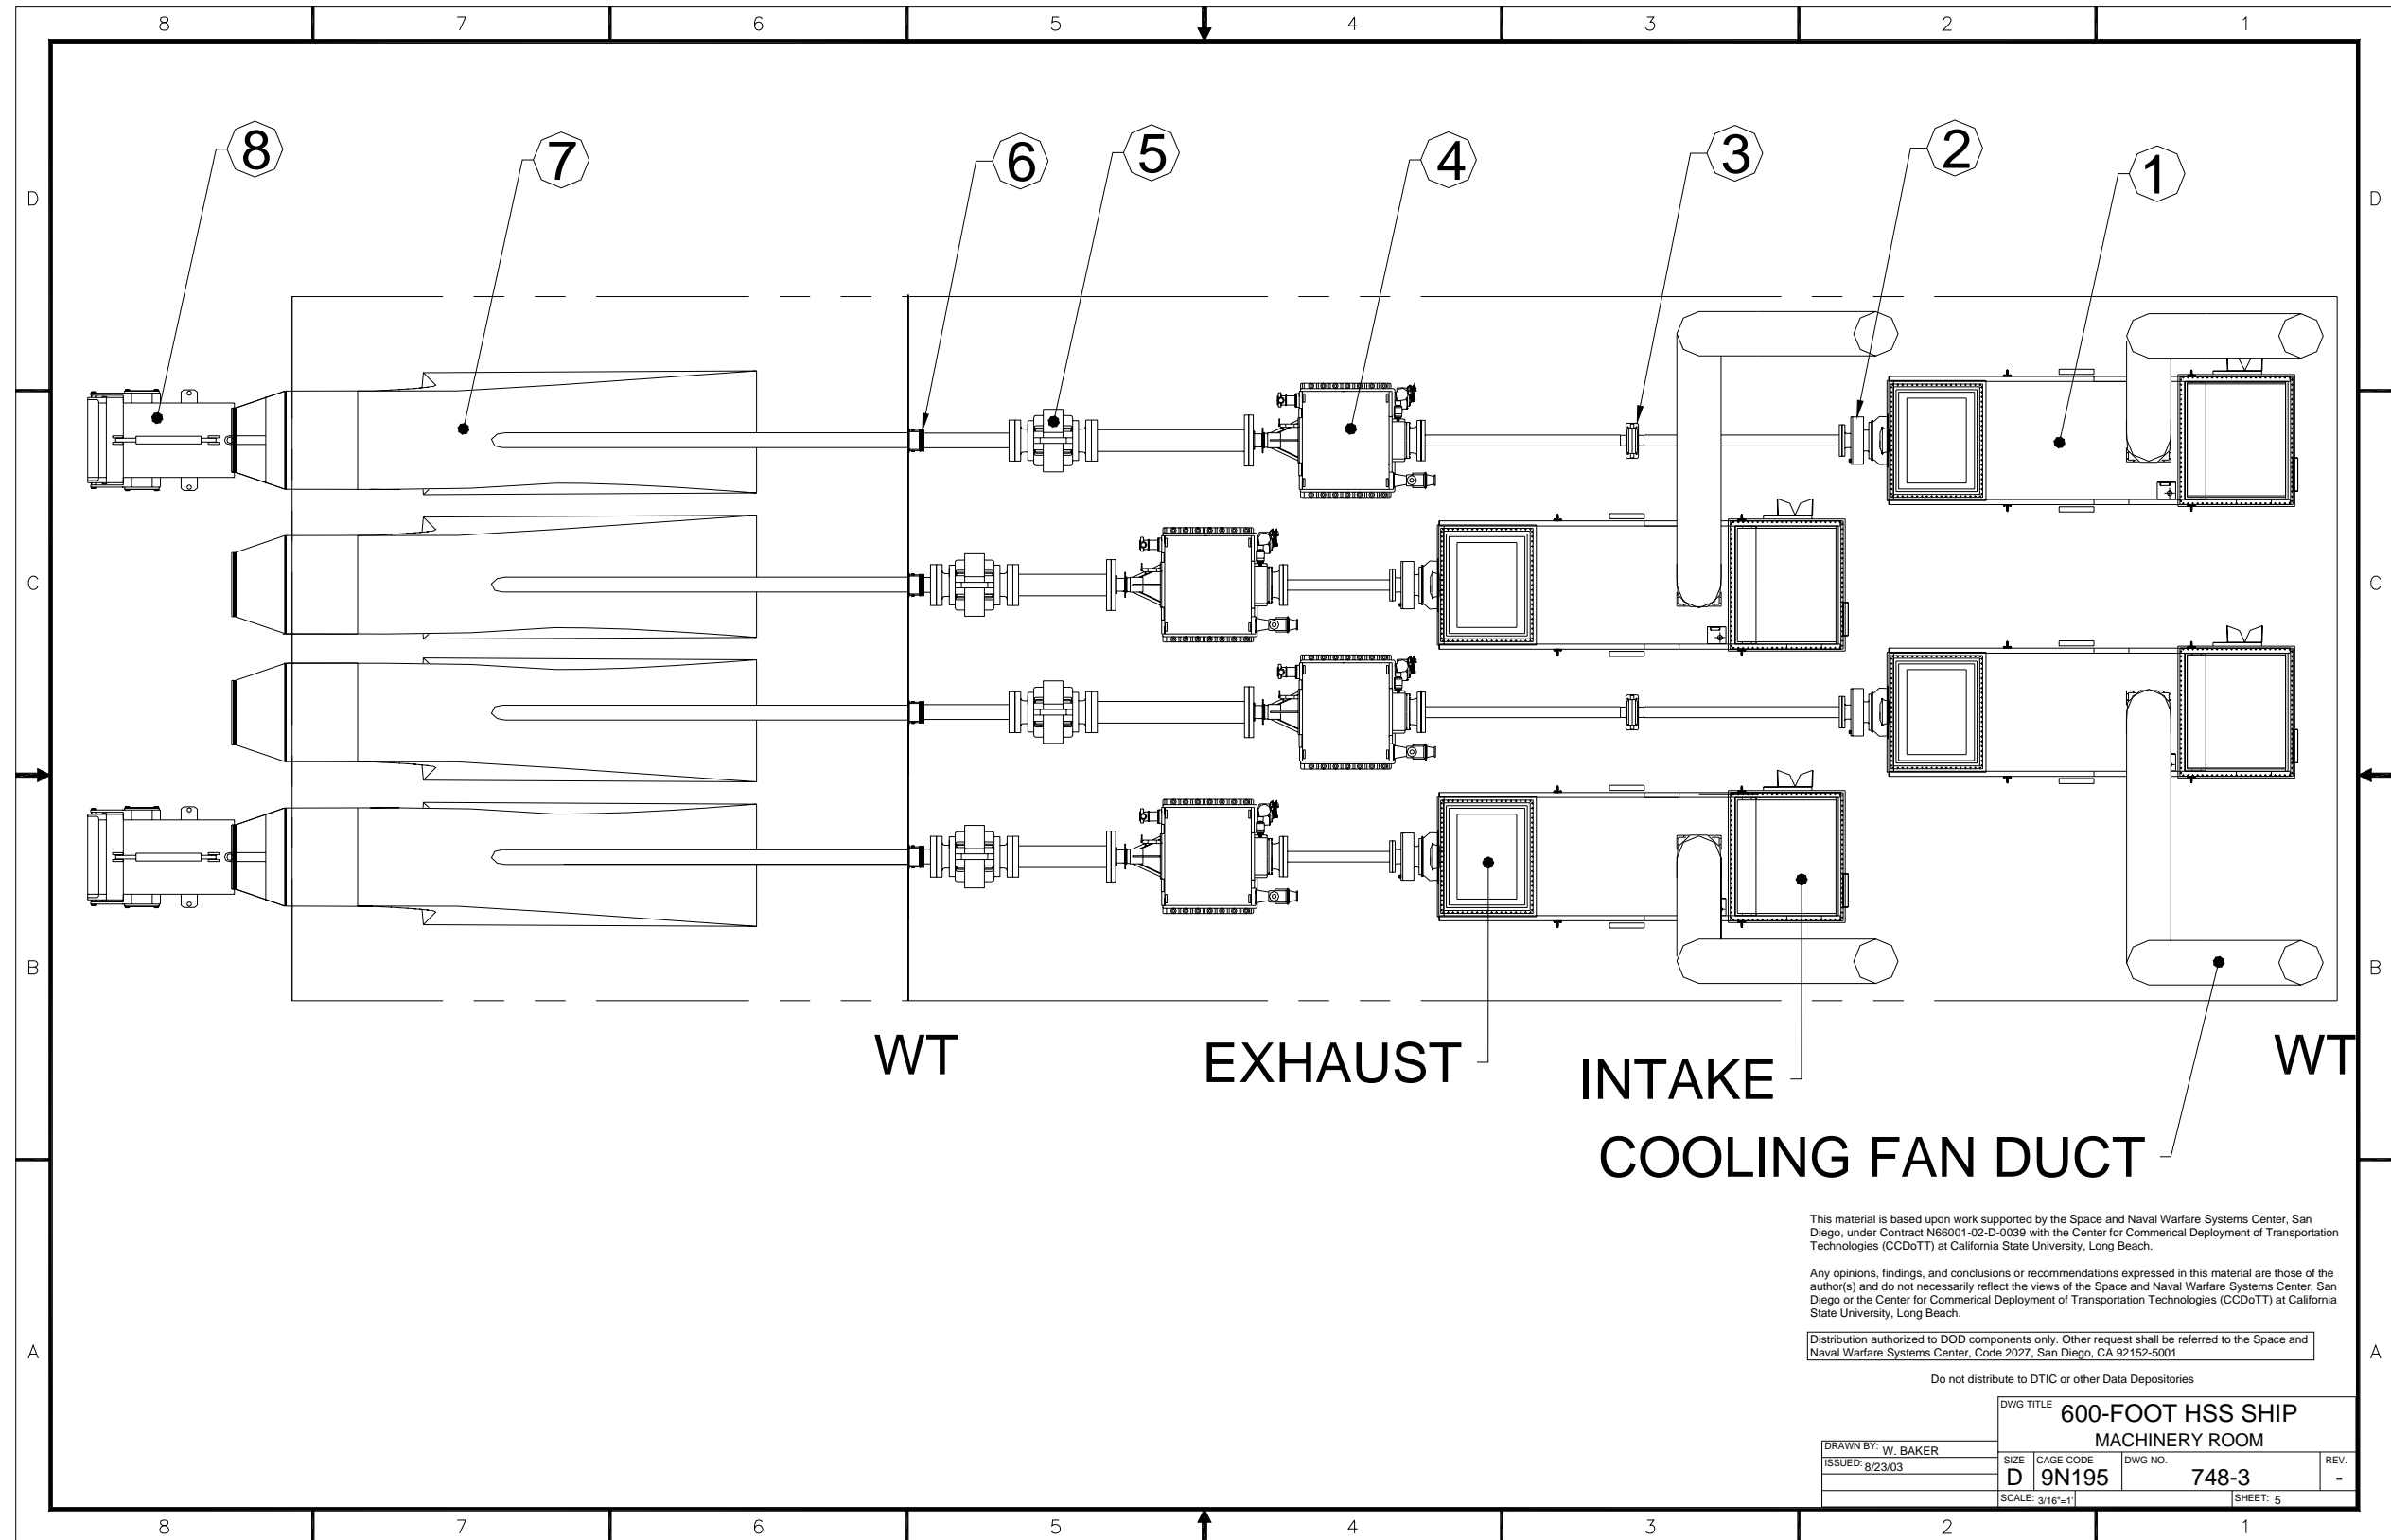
600-Foot High-Speed Sealift (HSS) Machinery Room
